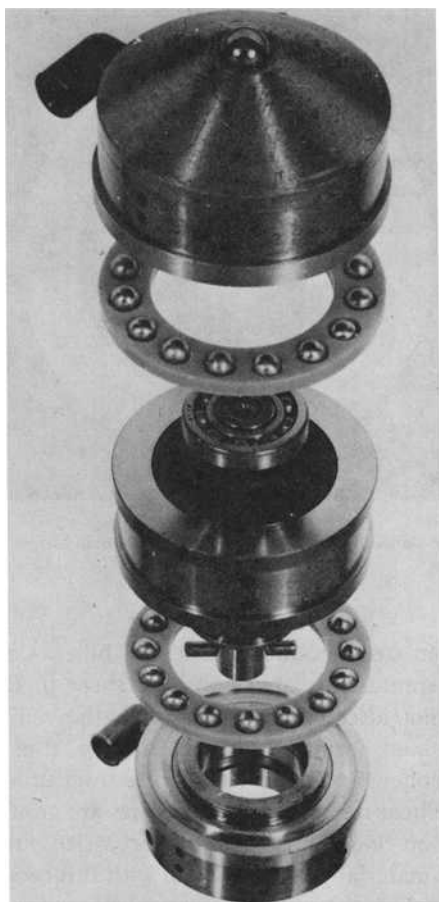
A flat washer test assembly illustrating the test washers located on the central driven shaft.
